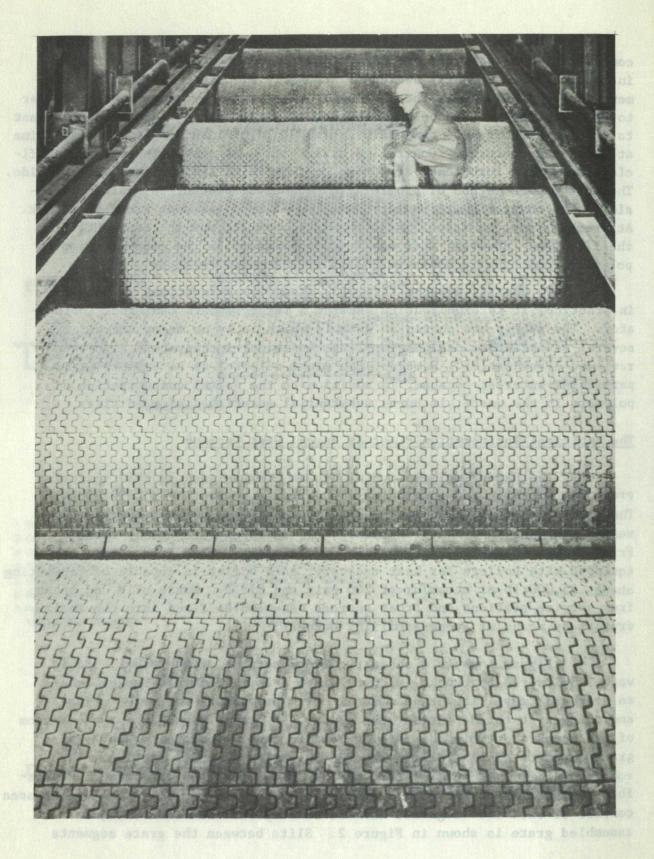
A view of the Duesseldorf-System roller grate during assembly. Courtesy Vereinigte Kesselwerke, A.G. Duesseldorf, W. Germany.
